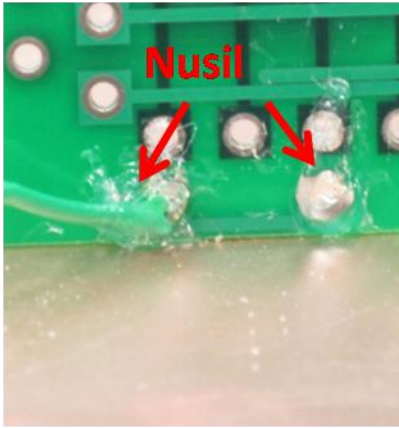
The PCB with silicon elastomer covered on the via and solder joint
